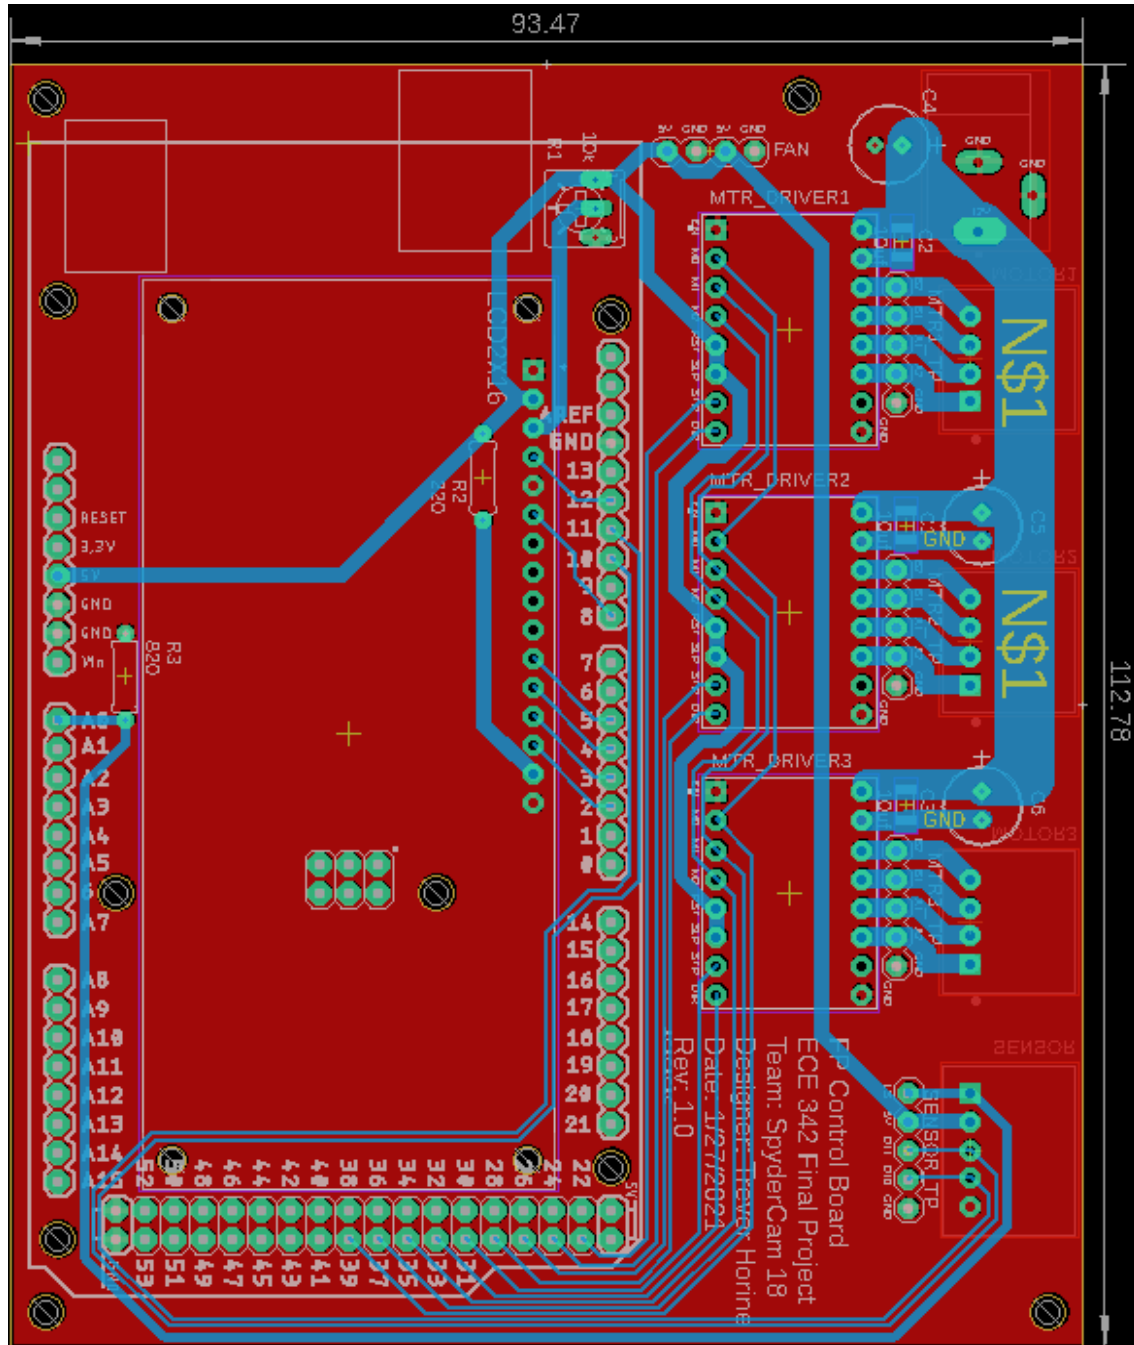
Layout of the PCB board built from the schematic in Figure 27, red is the bottom layer and a ground plane, blue is the top layer with traces for signals.
